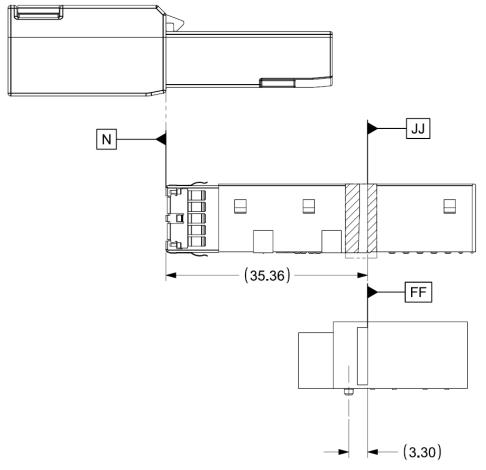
Cage, X8 SMT Connector, Module Alignment
